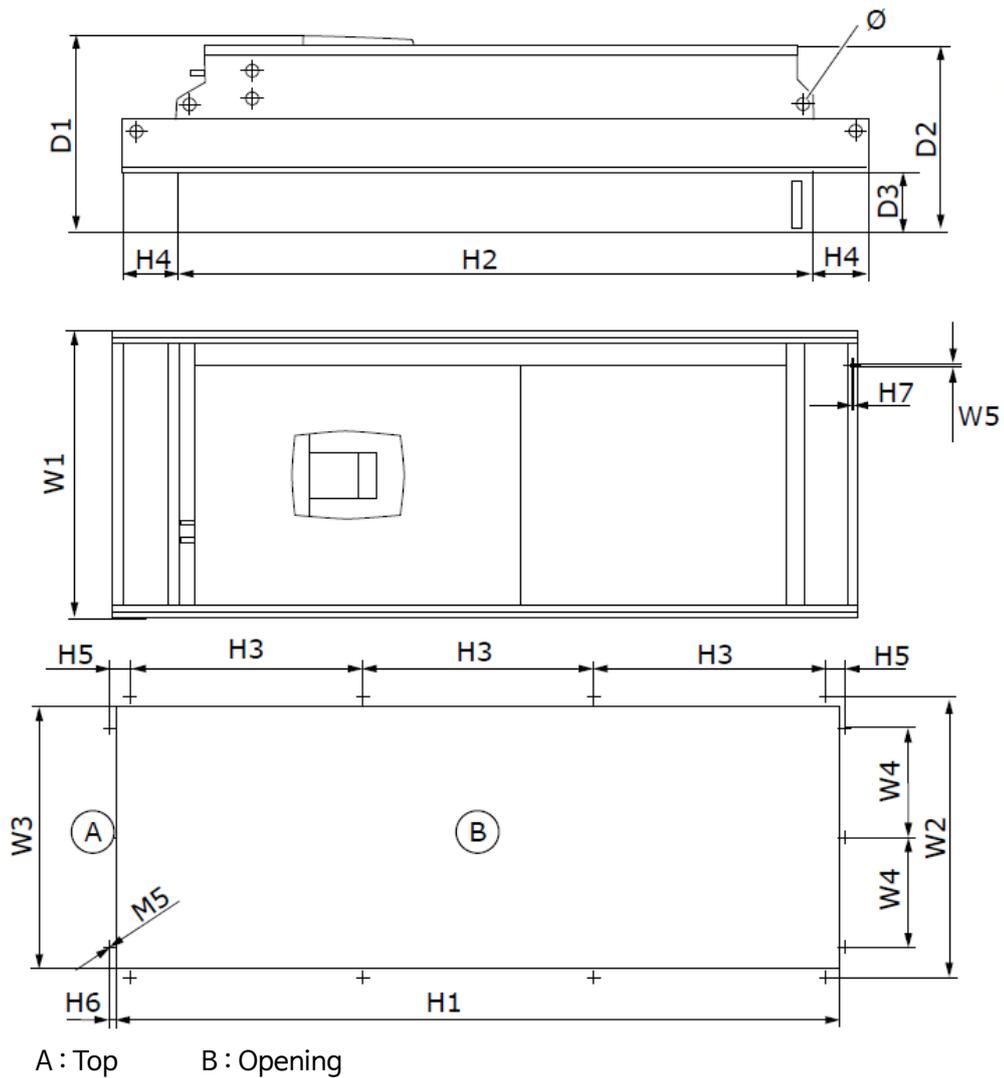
Dimensions of the Opening and Drive Outline with Flange, FR8
